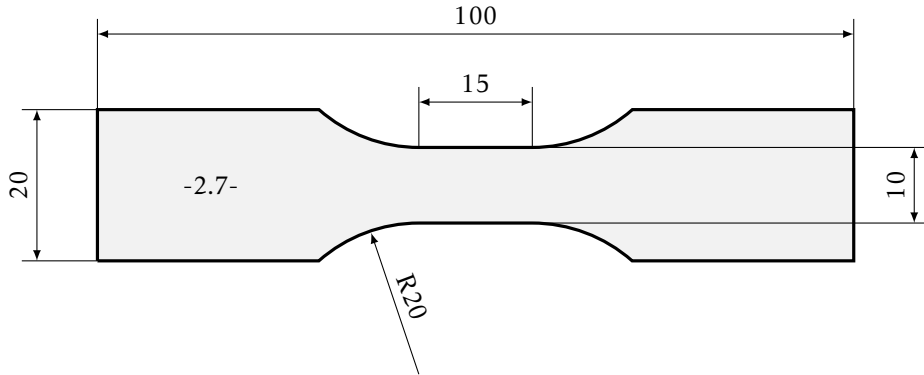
Geometry of uniaxial tensile test specimen. Dimensions are in millimetres [mm].
